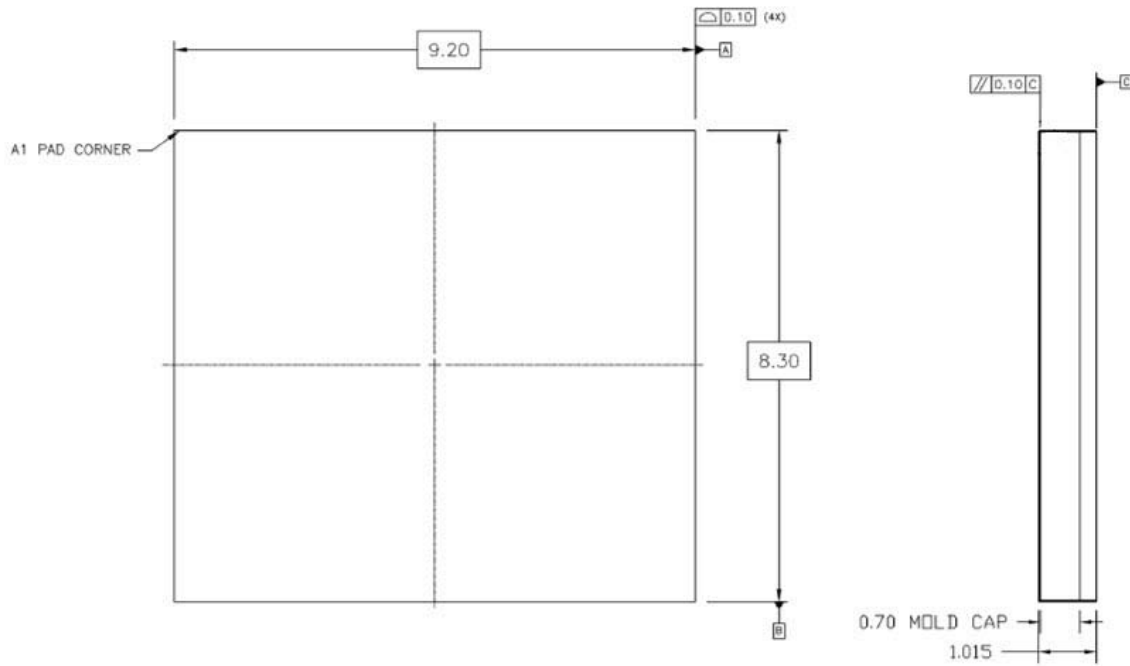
AR6103 Package Dimensions Top and Side Views
